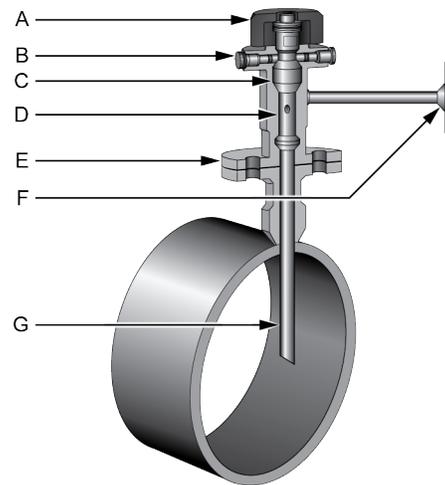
shows the parts for the Roxar Chemical Injection and Sampling System in a tee-type hydraulic flanged access fitting.
